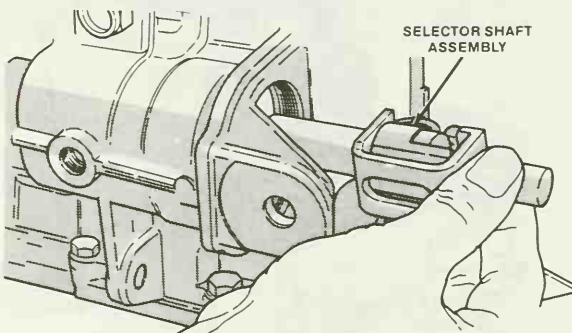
Removing the selector shaft assembly. (Chrysler Corporation)
